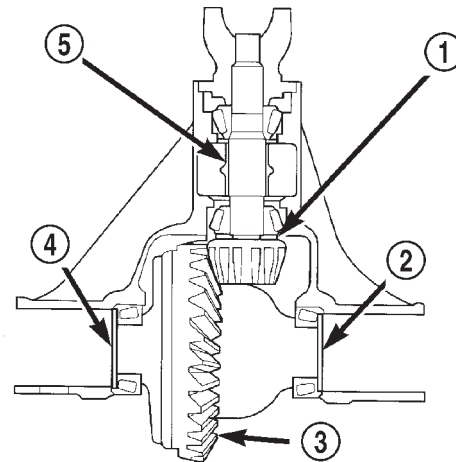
PINION GEAR DEPTH MEASUREMENT
